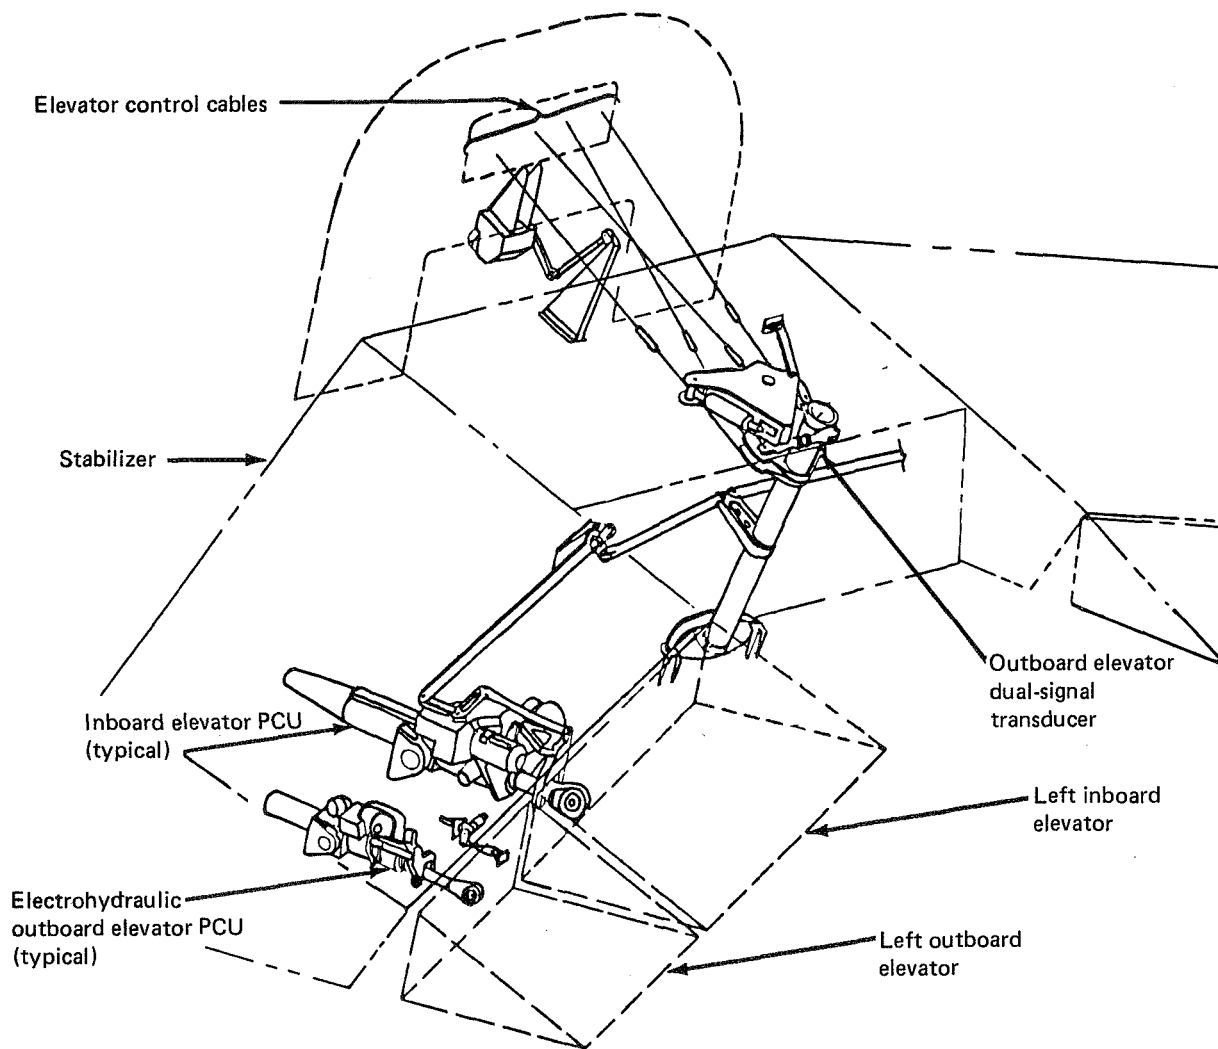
Outboard Elevator Electrohydraulic Power Control Unit (PCU) Installation
